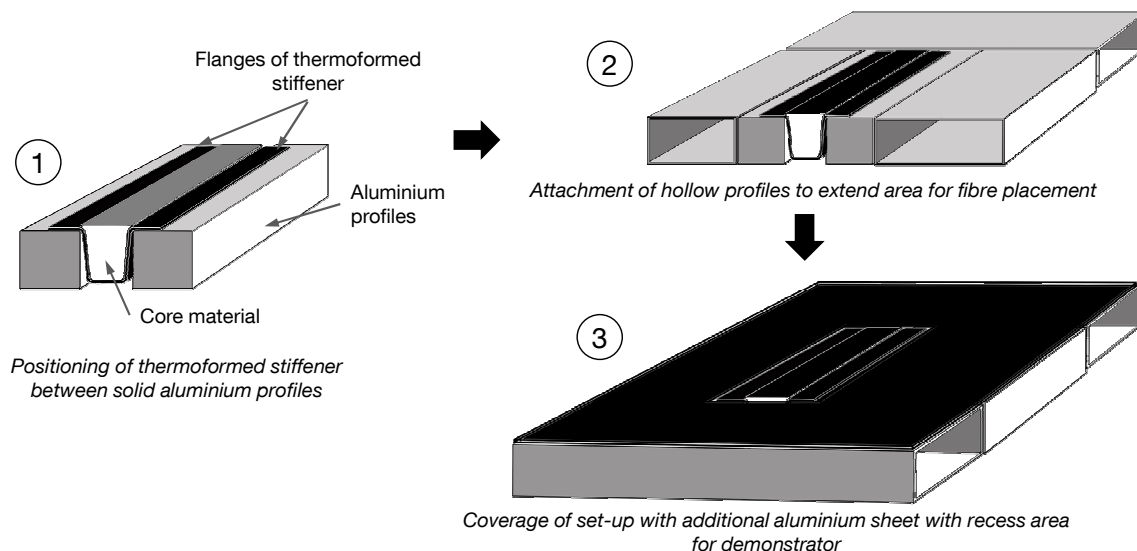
Manufacturing concept for in-situ joining of demonstrators
